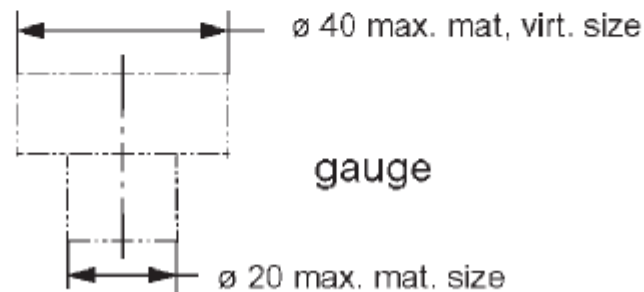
Gauge for GD&T according to Fig. 9.9
